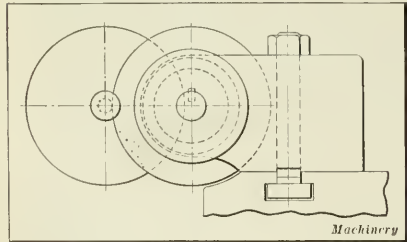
End View of Grinding Attachment shown in Fig. 2
